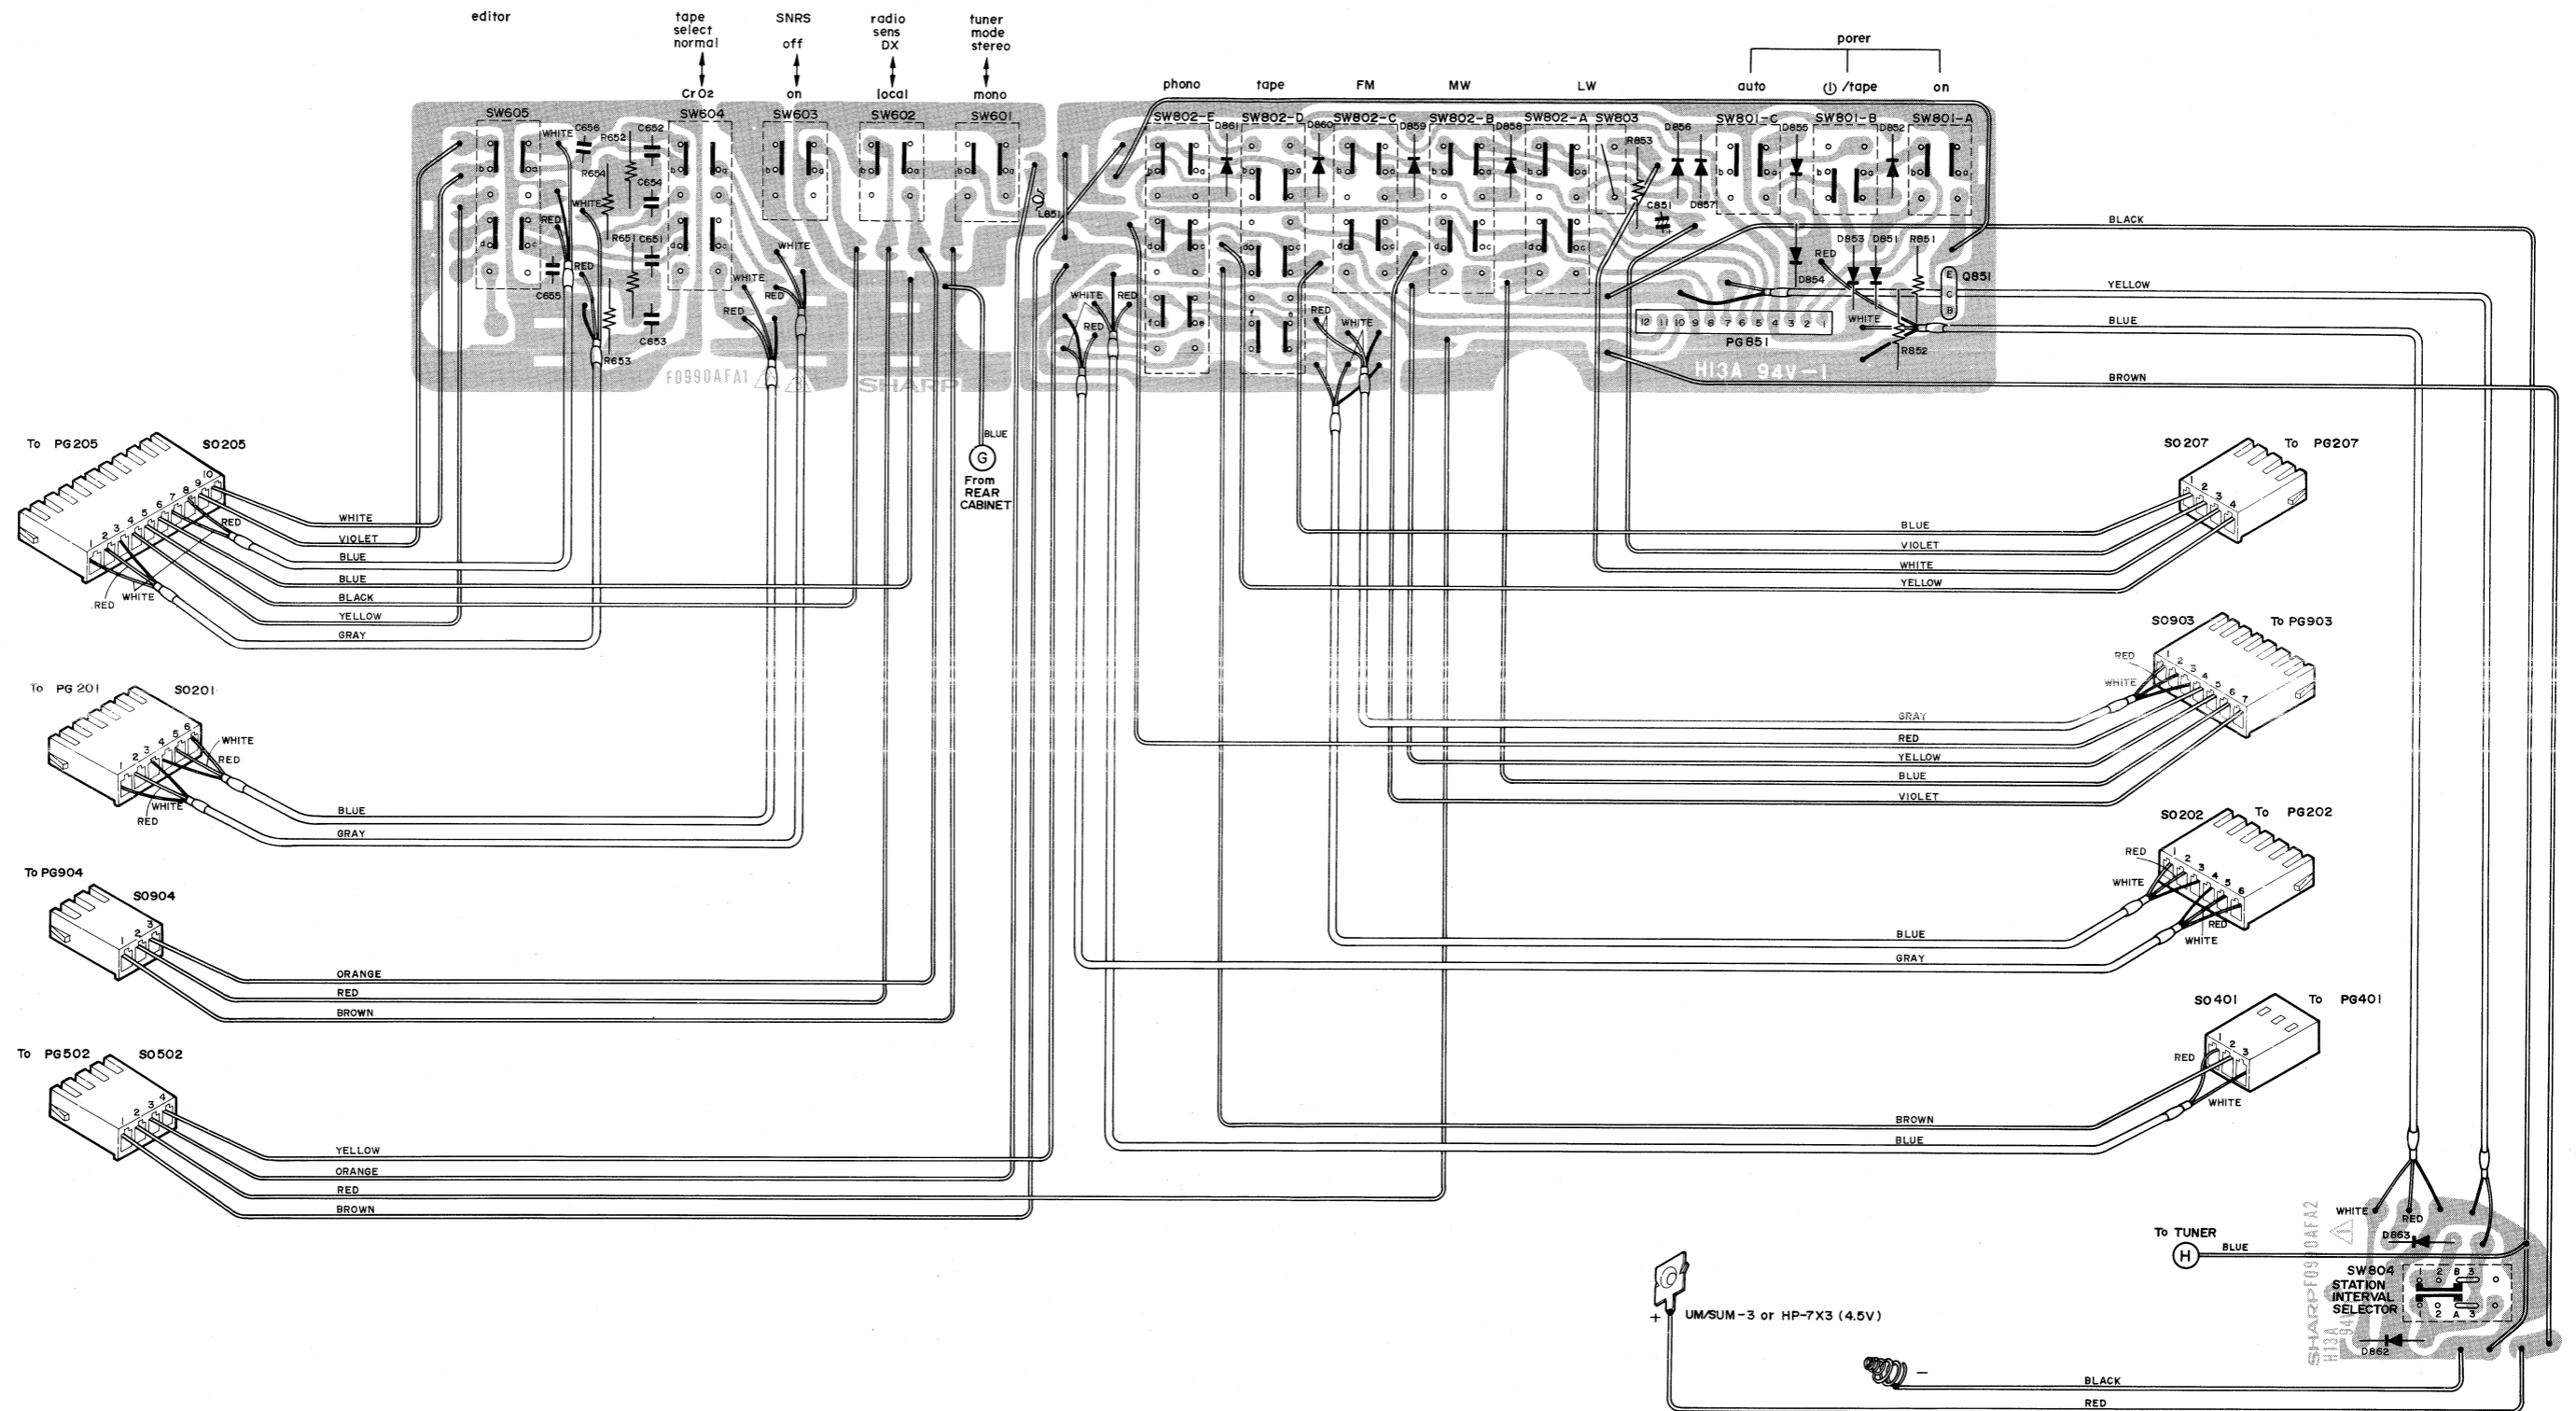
WIRING SIDE OF SWITCHING CIRCUIT PRINTED WIRING BOARD
